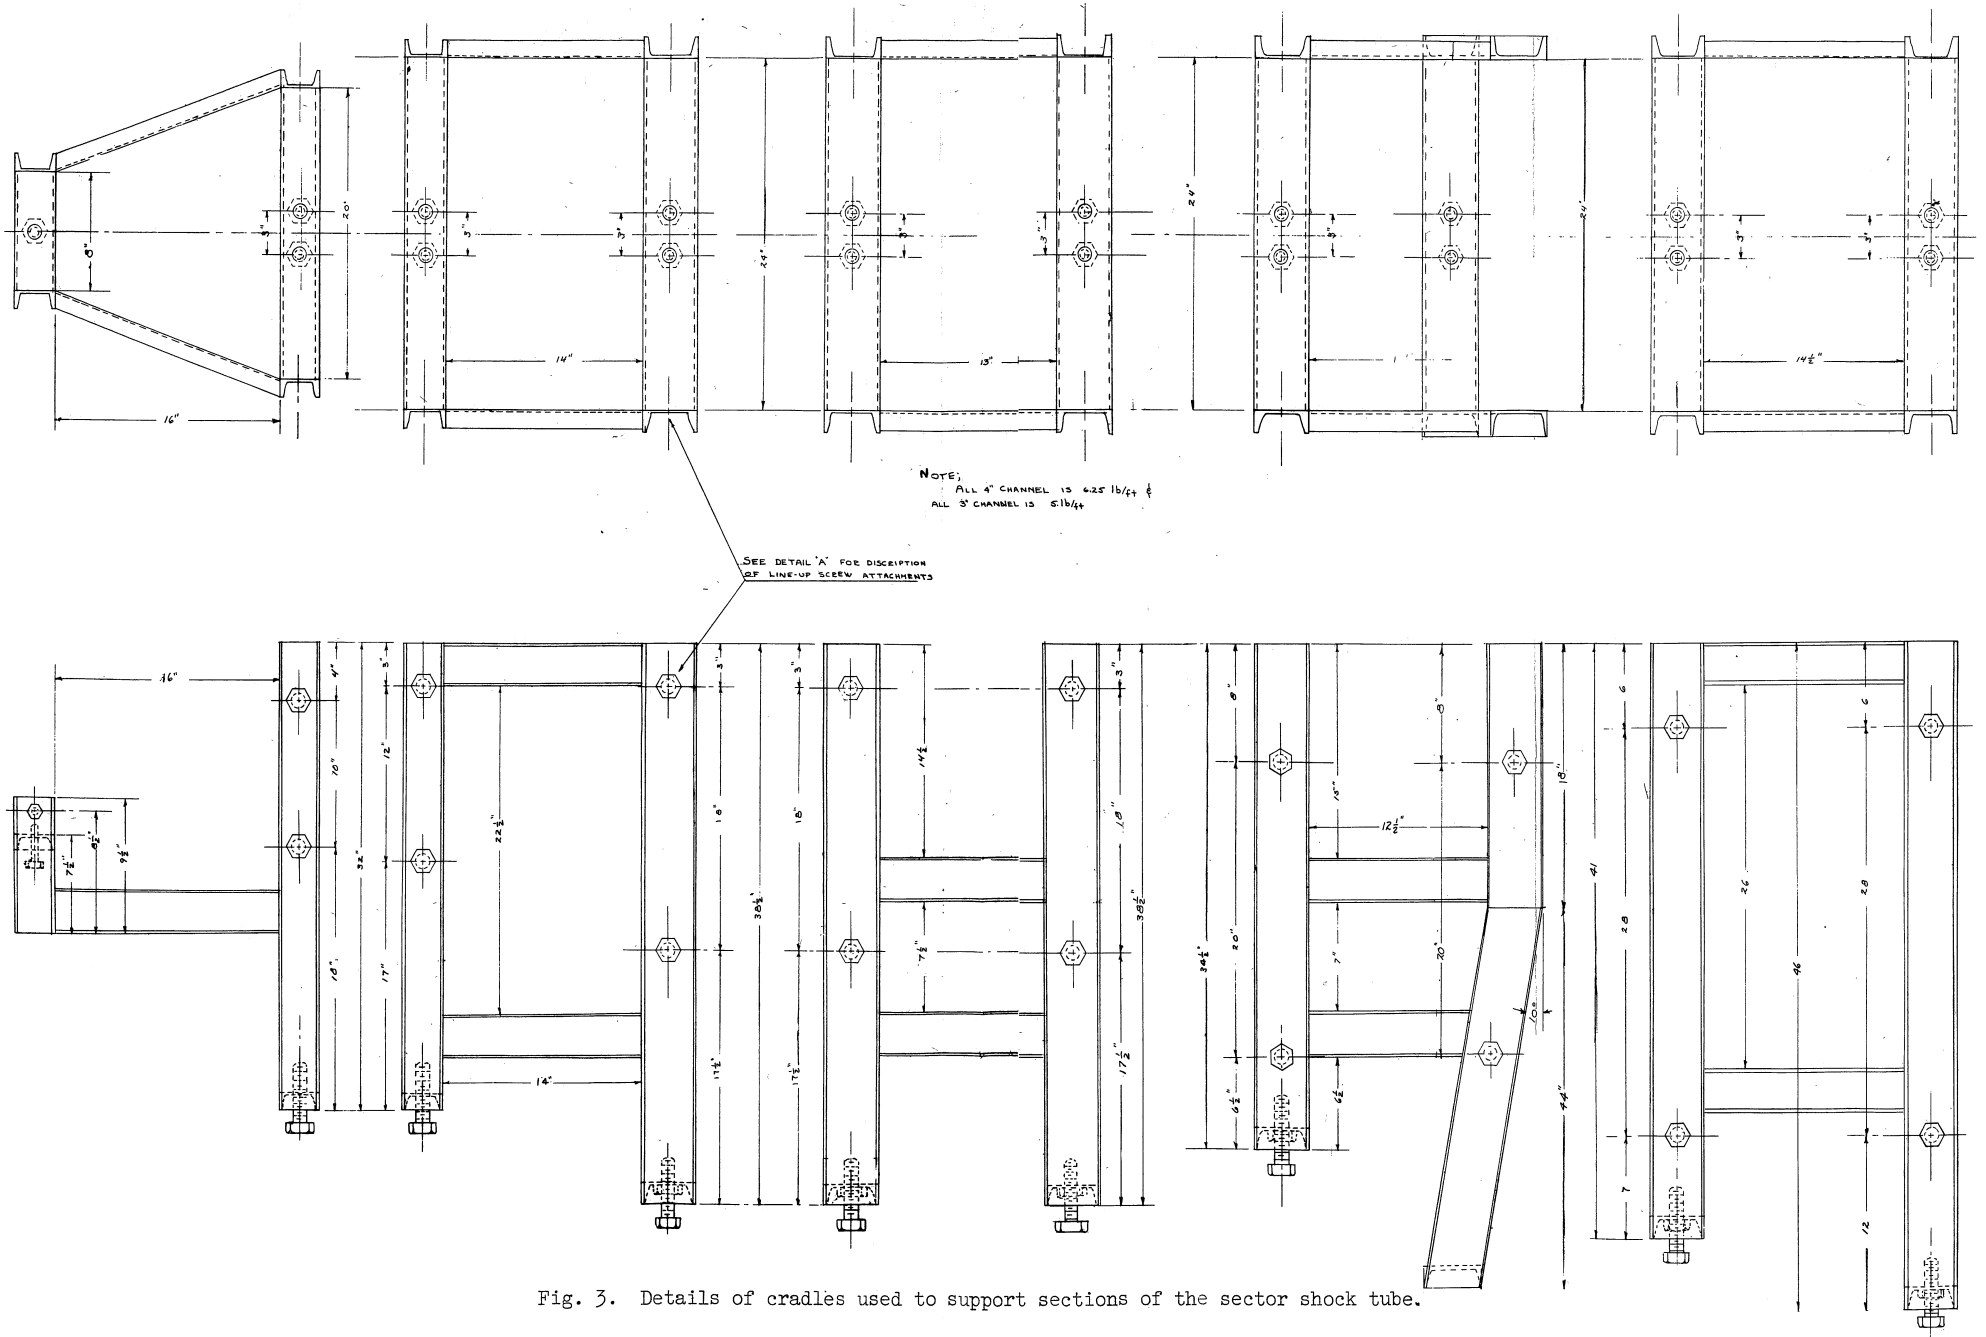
Details of cradles used to support sections of the sector shock tube.
